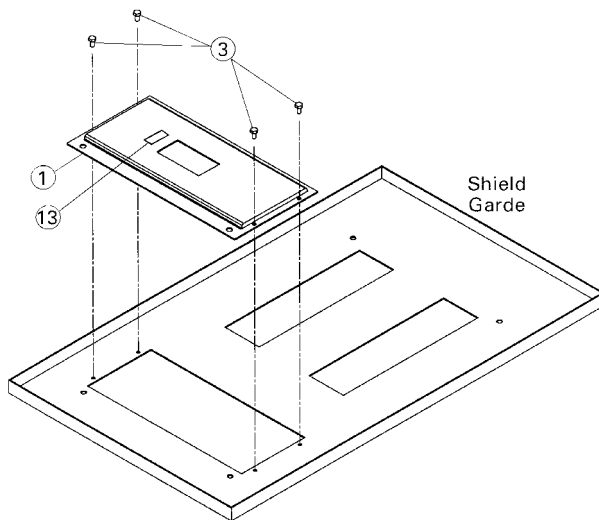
Attaching the shield insert to the shield for installation of an MB233 or MB233WB kit.
